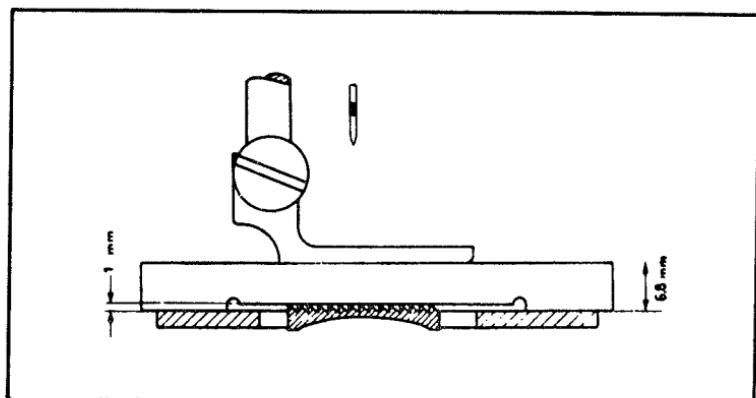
Cutaway view showing the method of simultaneously adjusting the feed-dog height and presser-bar height on Pfaff Models 260, 262, 360 and 362.
